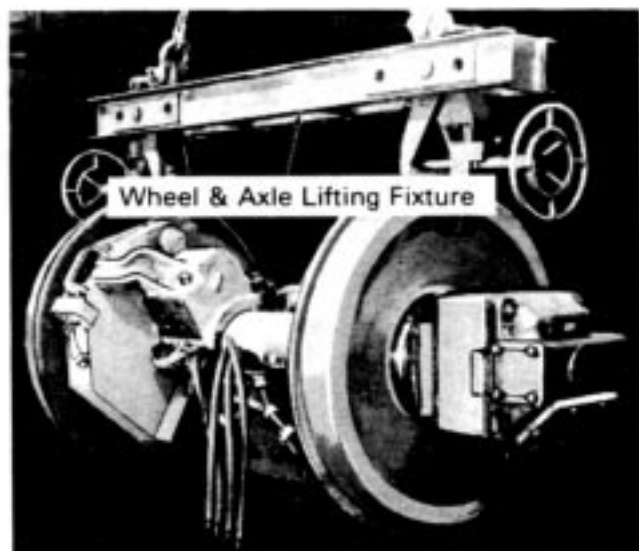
Removal Of Wheels, Axle, And Motor Assembly
